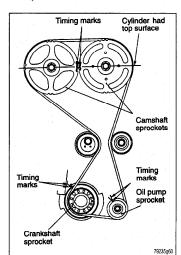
Camshaft and crankshaft timing belt sprocket TDC alignment mark positioning for timing belt removal and installation— 2.0L turbo engine
